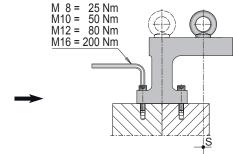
Tightening torques for cylinder head screws and grub screws 8.8
